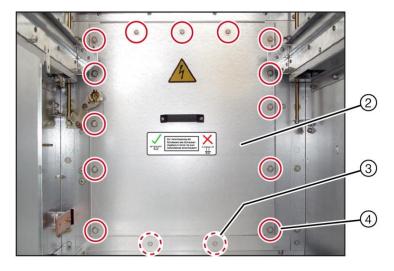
Panel versions with panel width 800 mm: 15 bolted joints
